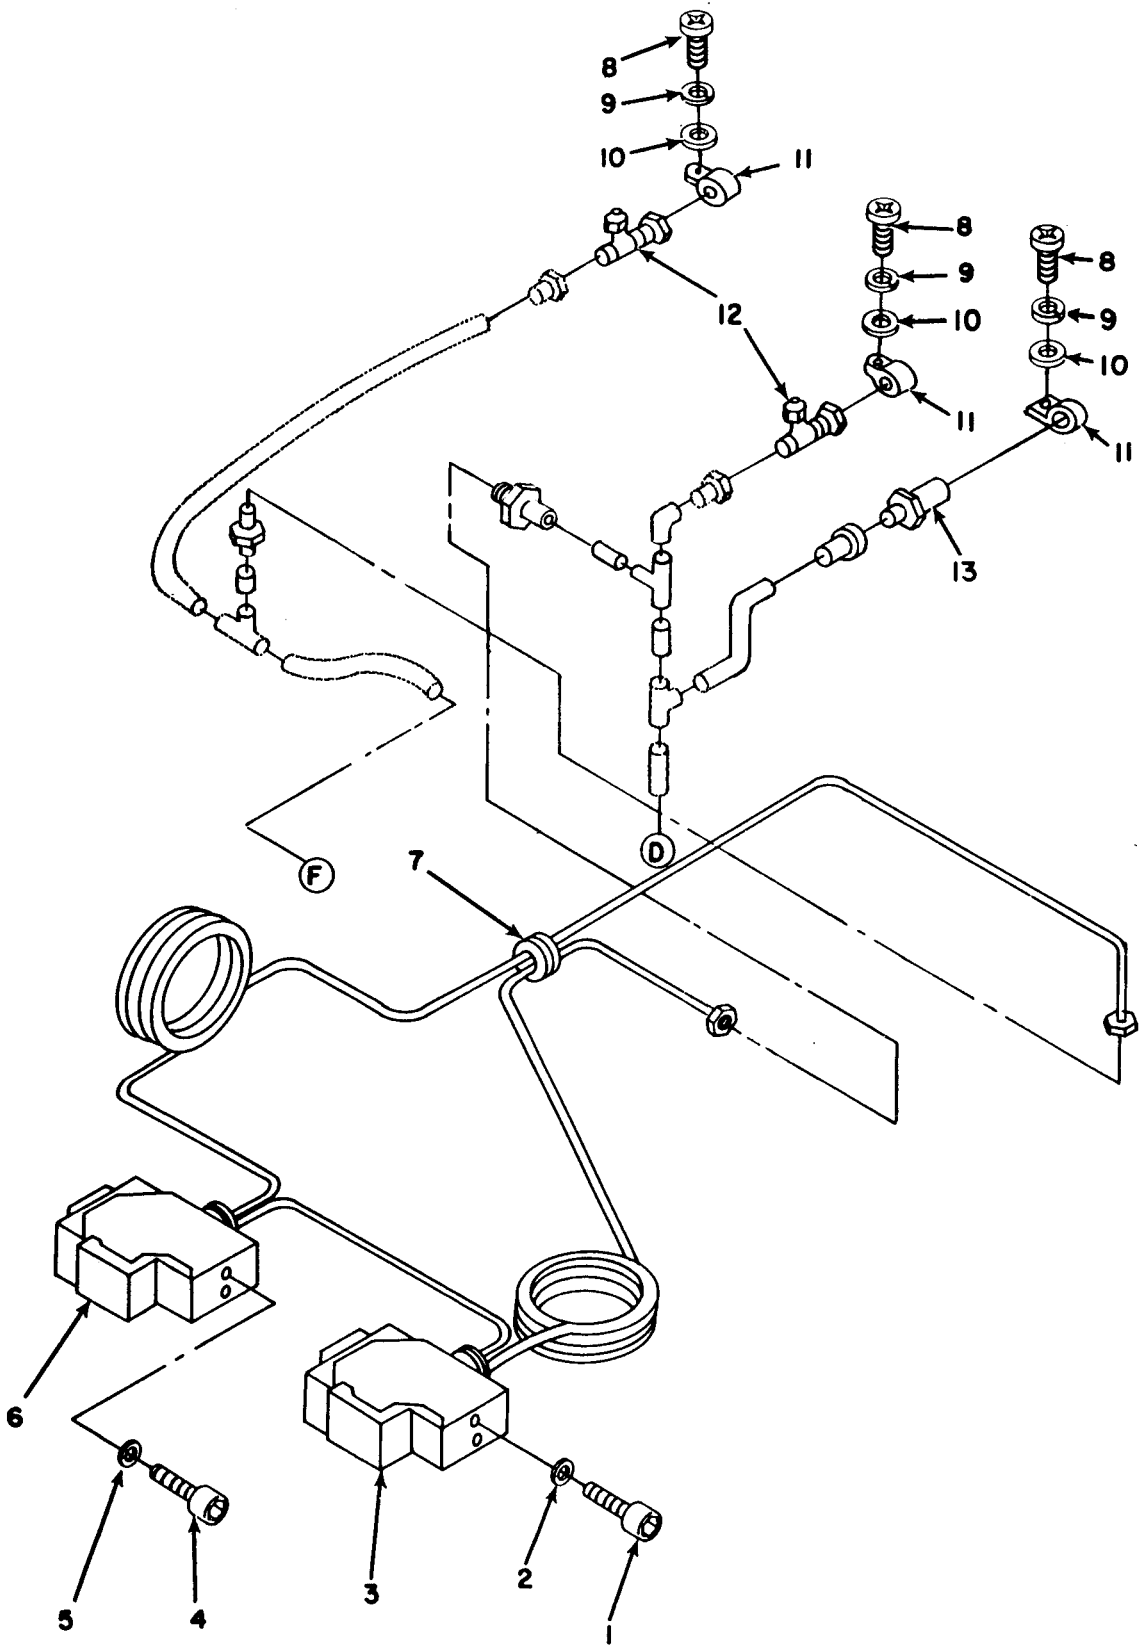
Pressure Switches, Service Valves, and Pressure Relief Valve
